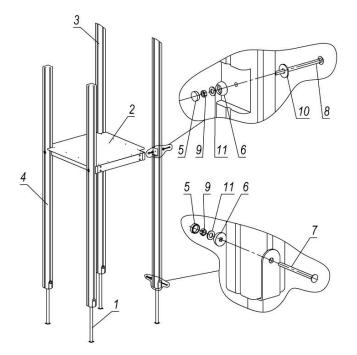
Assemble and install the tower with with site height of 1.5m above the ground
